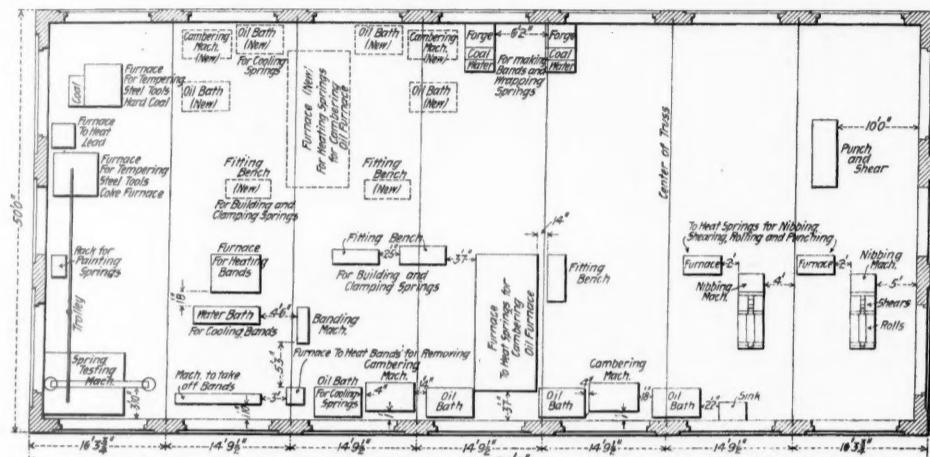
Arrangement of Machinery in Altoona Spring Shop.
